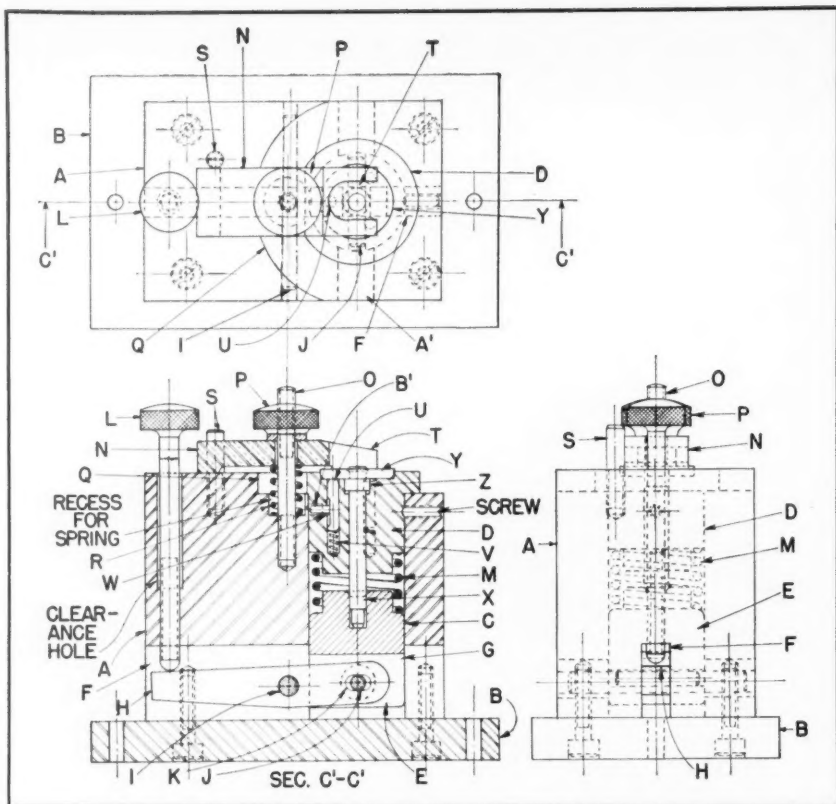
Sketch of fixture used in riveting together the thin washer and small diameter rod shown in Fig. 1
